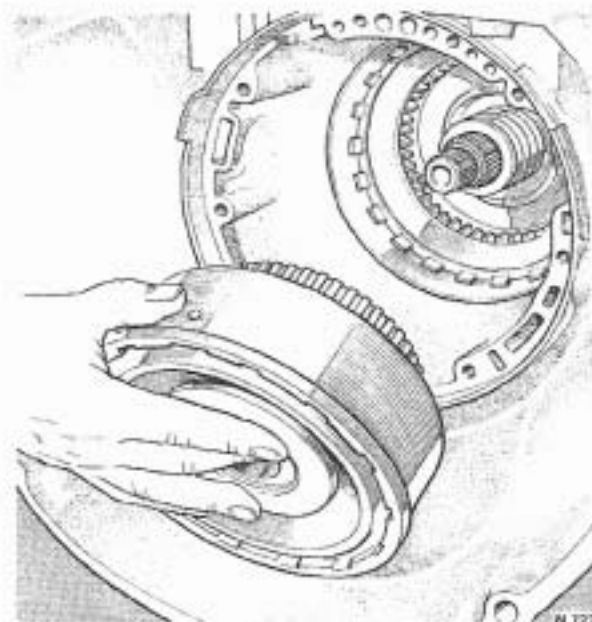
REMOVING THE DIRECT CLUTCH AND INTERMEDIATE SPRAG ASSEMBLY
